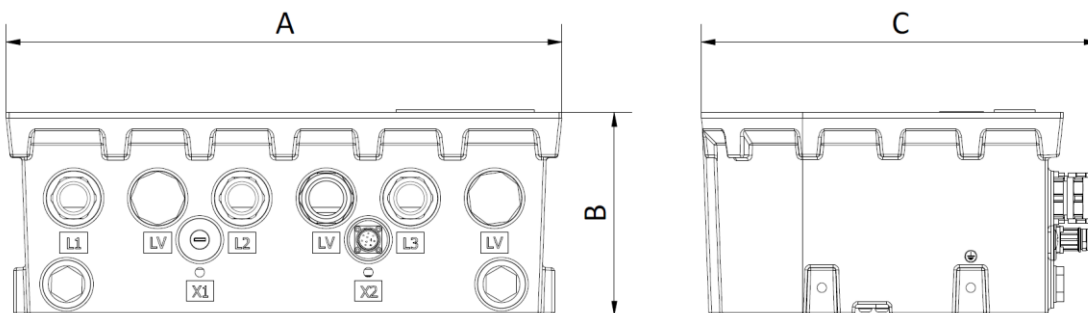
Device dimensions with +CG1 option (example cable gland configuration, 3x M25, 1x M32 cable glands and 2x M32 plugs)
